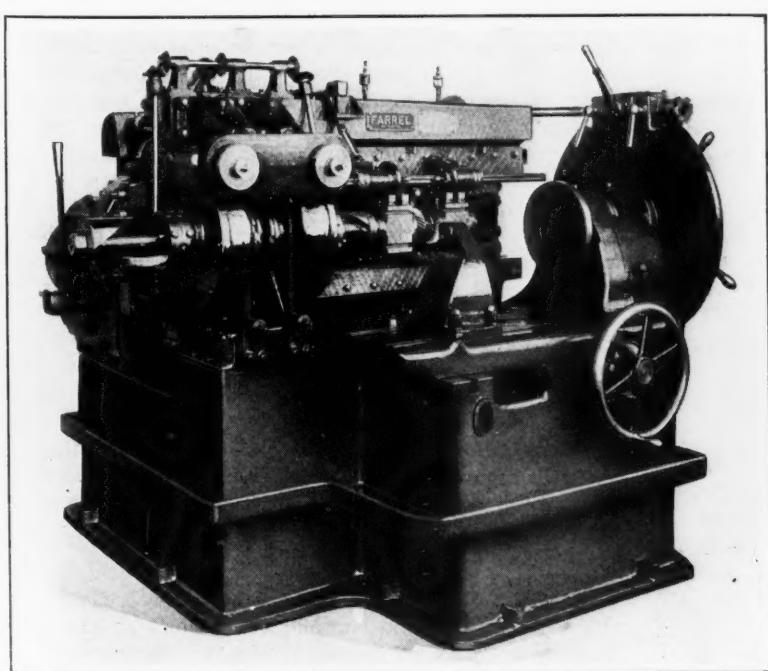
Front View of a Generator for Gears up to 19 Inches in Diameter
